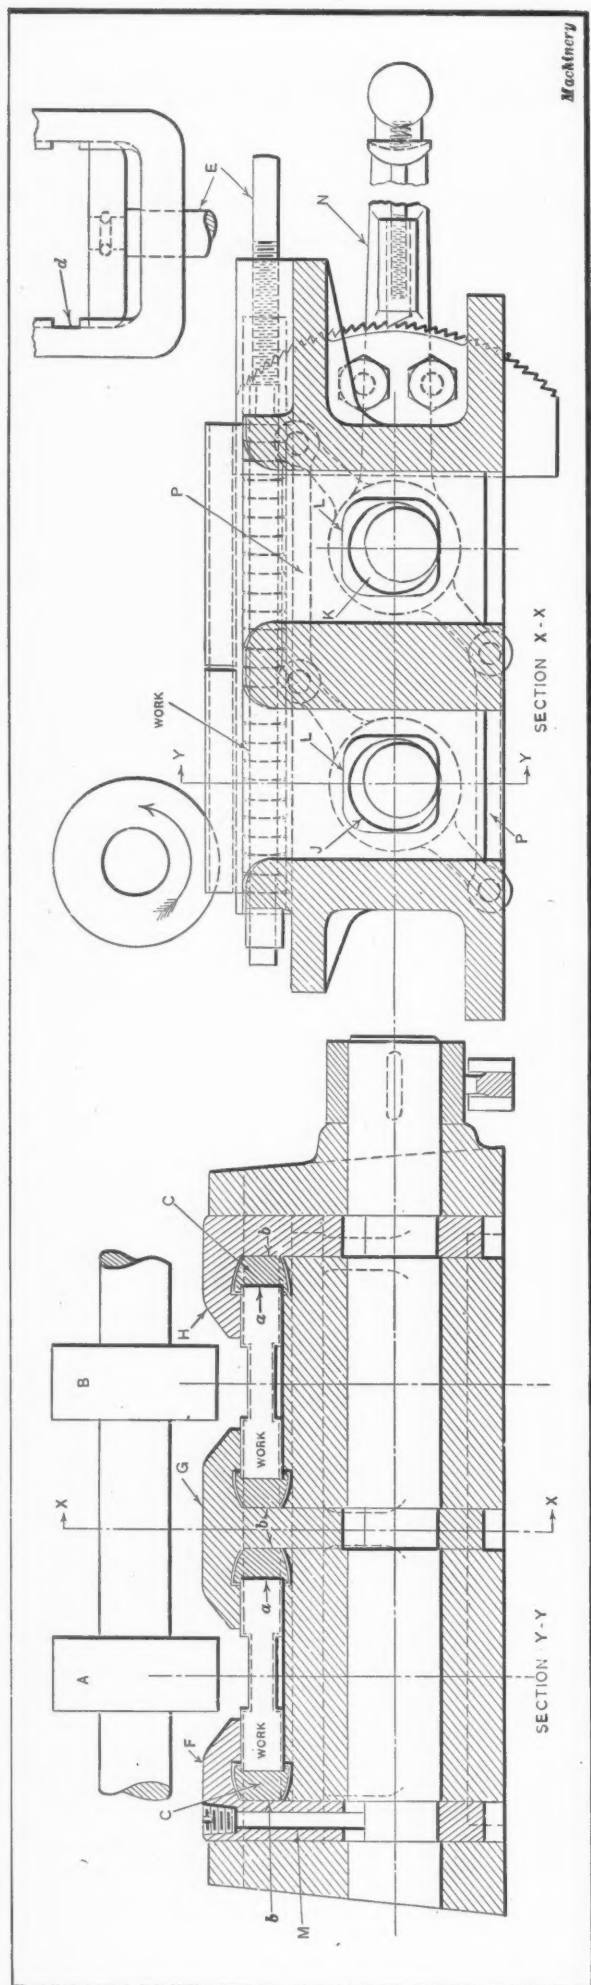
Milling Fixture equipped with Two Work-holding Cages and Clamping Jaws actuated by Eccentric Shafts
